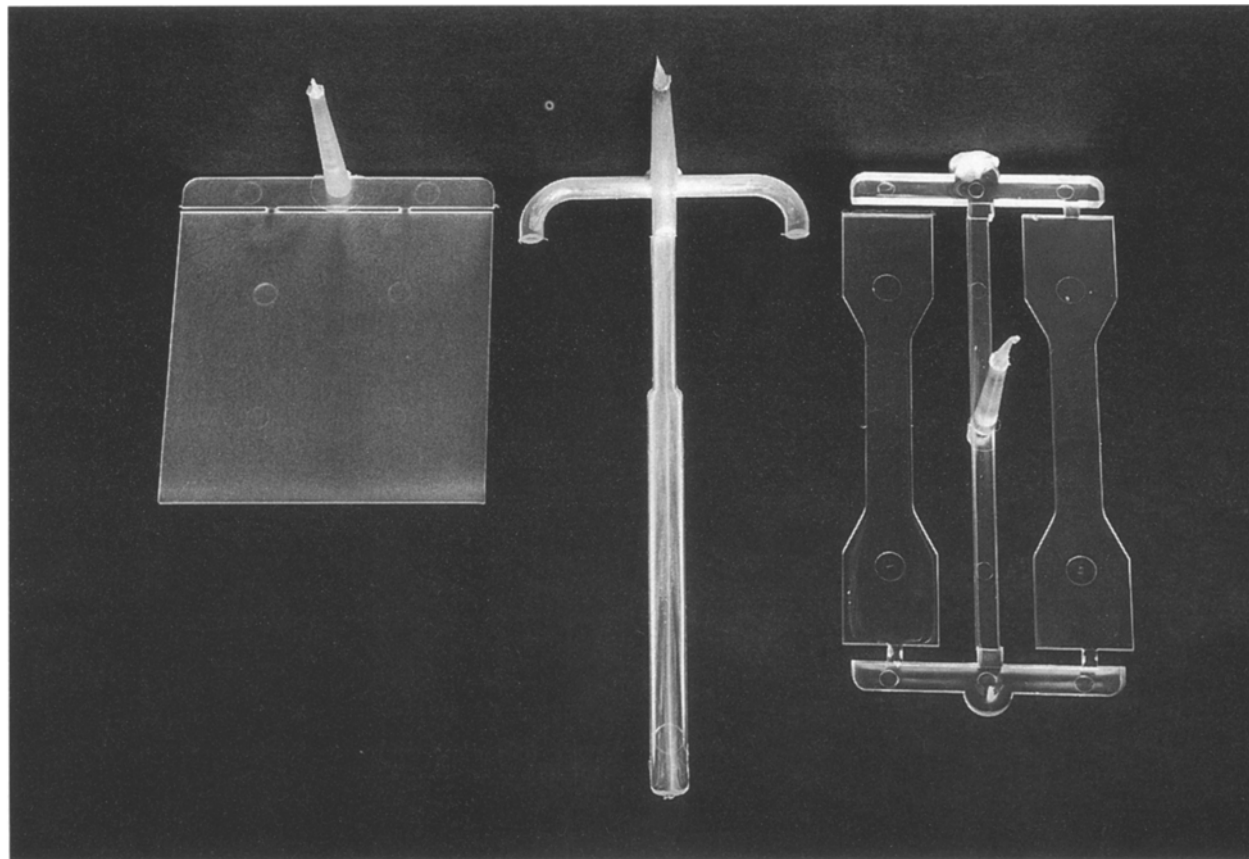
Injection mouldings used; tensile bars, flexural bars and plaque mouldings.
